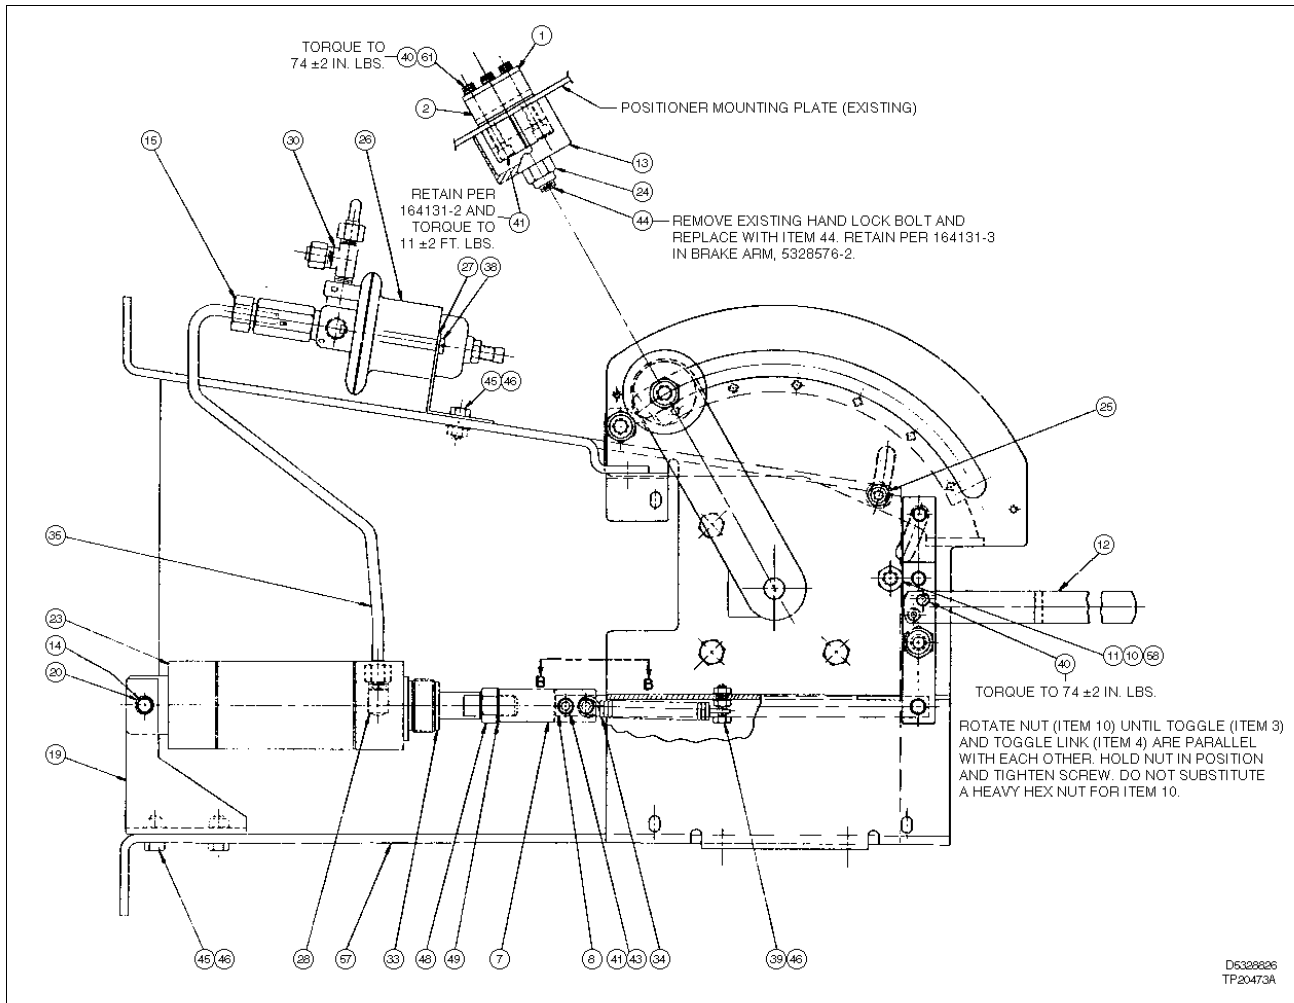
UP1 Air Failure Lock Kit, Table A-7 (Sheet 1 of 2)
